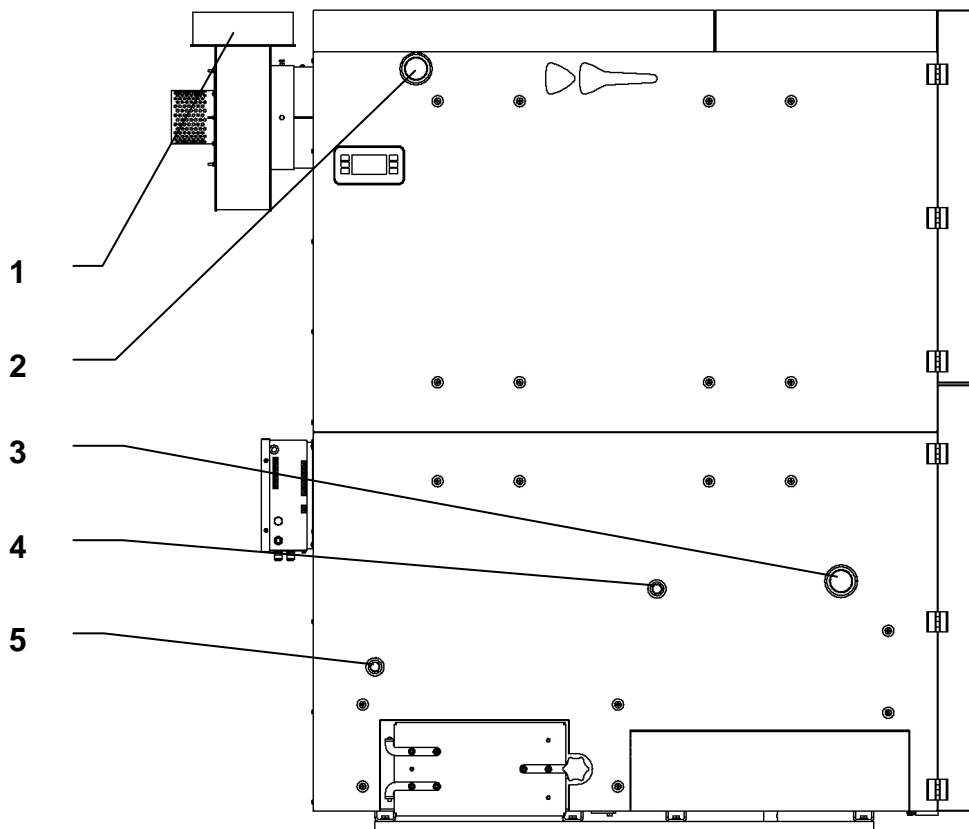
Inlets and outlets of the BENEKOV S100 boiler
